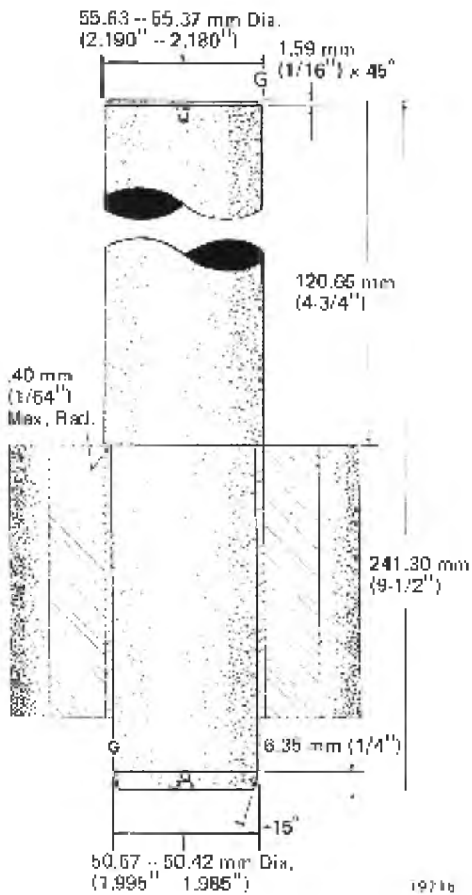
Oil Pump Driven Gear Bushing Tool
